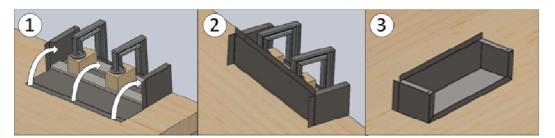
Bend #8- Bend flange up- (1) Bend the flange up until it is perpendicular with the work table. (2) Finished work piece still clamped down after completing Bend #8. (3) Finished work piece after being unclamped from work table.
